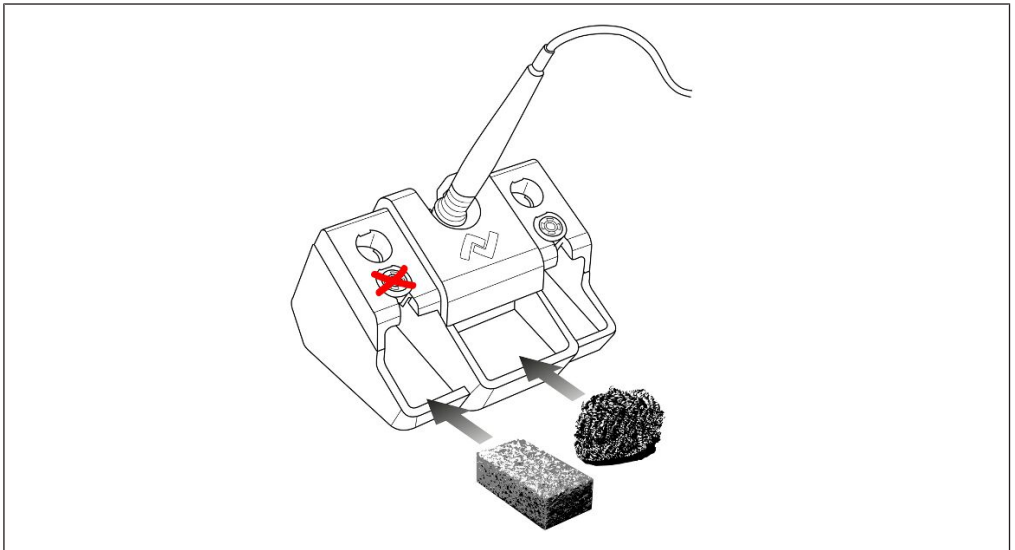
Proper storage position of the soldering iron. Positioning the dampened sponge and the dry cleaner. If the sponge is inserted, do not use the front soldering tip holder!
